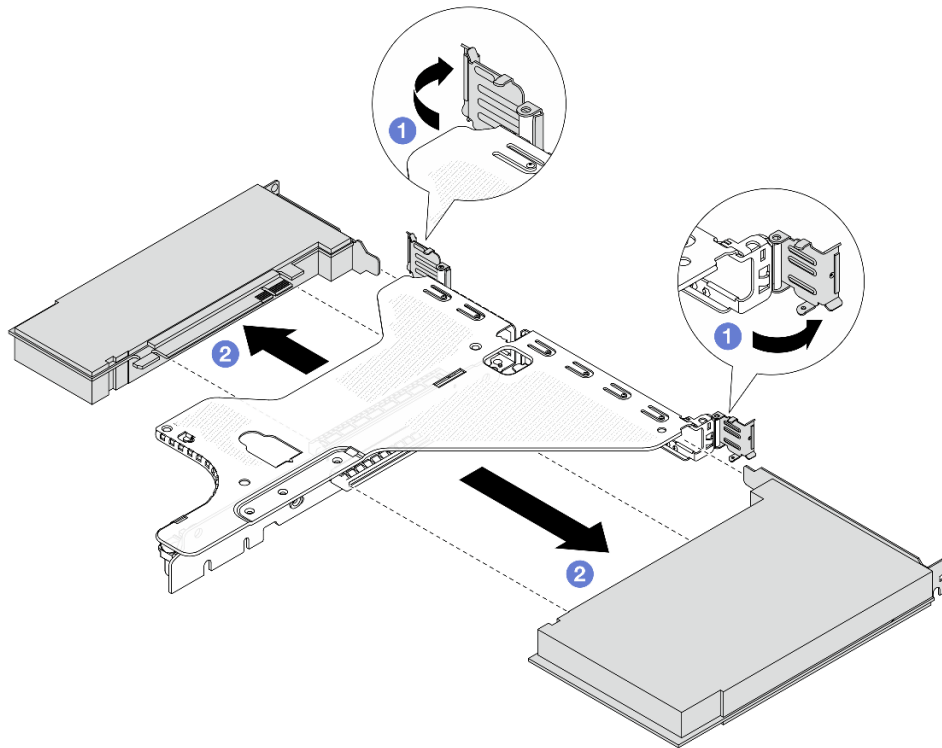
PCIe adapter removal from the LP-FH riser assembly
